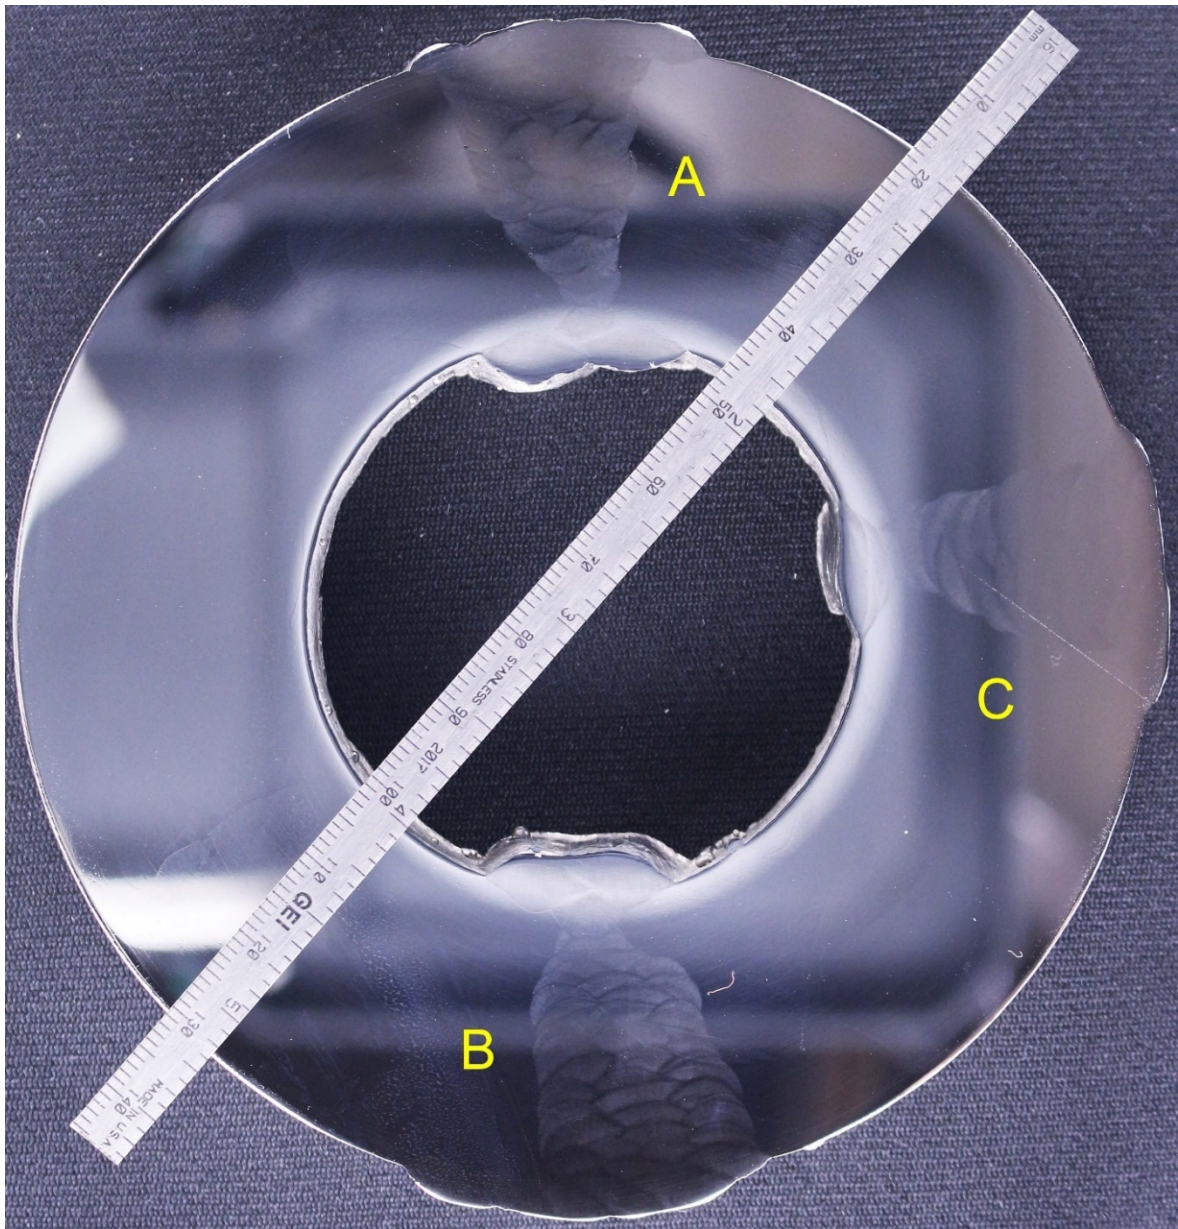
All three welds used in the study of the effect of the welding parameters on SCC: “normal” weld (A) made with using a procedure qualified to ASME IX, (b) “high current” weld (B), and (c) “high heat input” weld (C).
